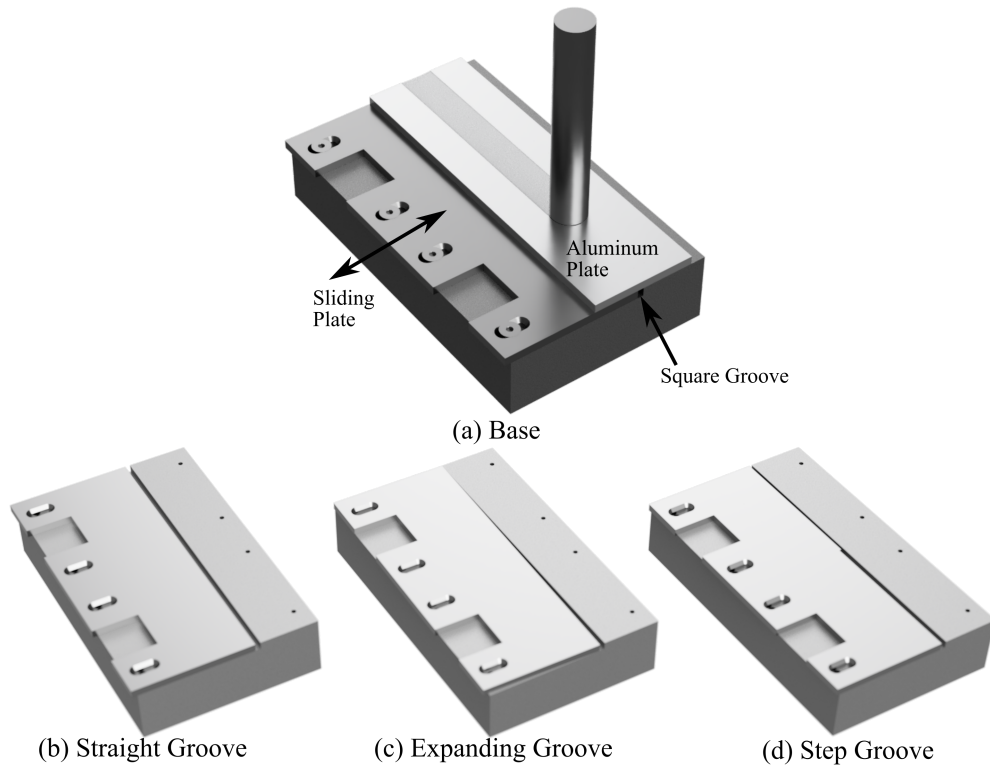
(a) The extrusion fixture was used as the bottom plate of an FSE weld. The fixture was configured in three different ways to provide different groove profiles: straight groove (b), expanding groove (c), and (step groove)
